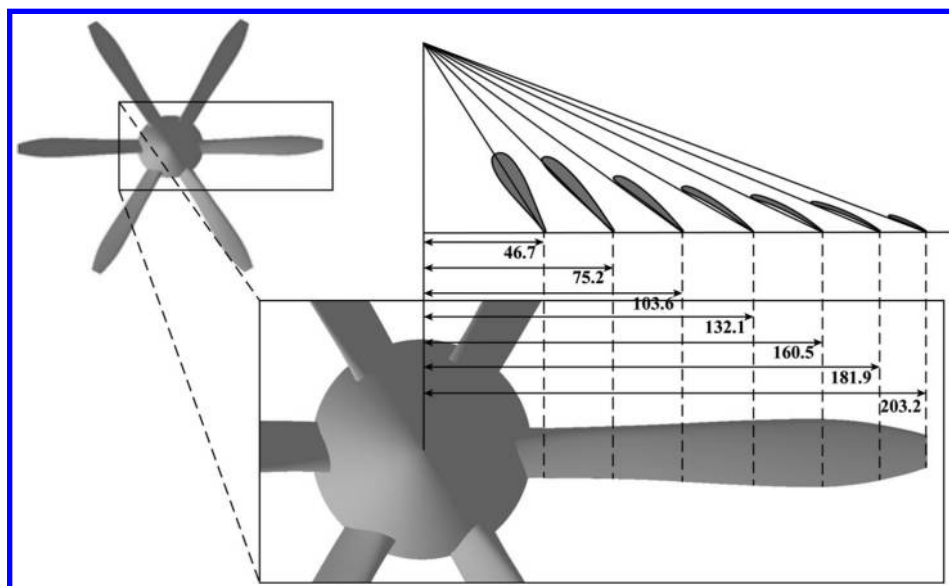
Propeller layout (dimensions in millimeters [18]).
